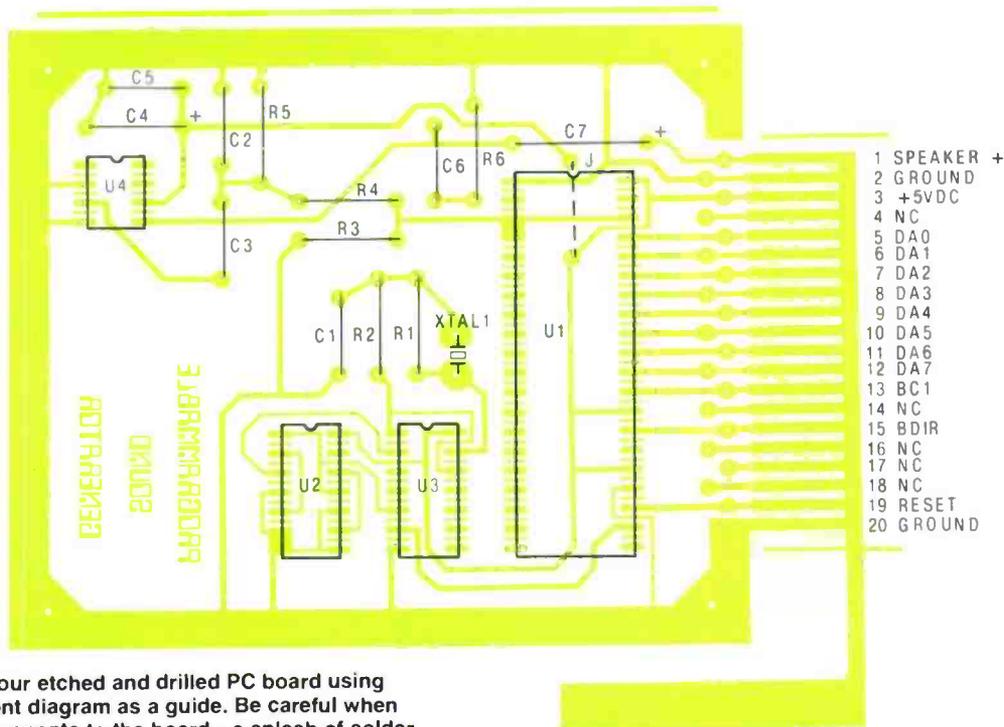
Populate your etched and drilled PC board using this parts-placement diagram as a guide. Be careful when soldering the components to the board—a splash of solder here, a little too much heat there, or a misoriented component anywhere and you might wind up with burned silicon; or worse, you could find yourself in the market for a new computer. Again, extreme caution is recommended.
